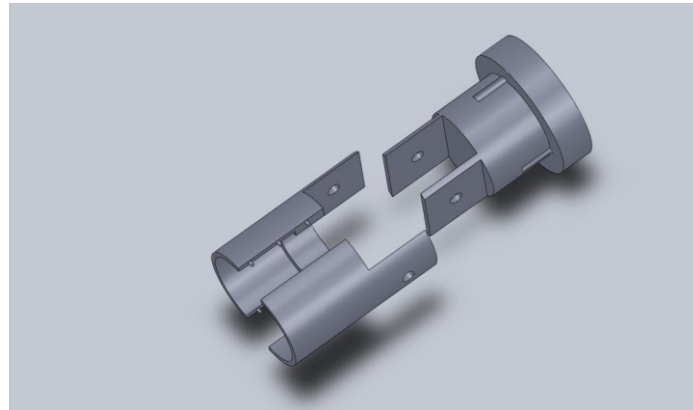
SolidWorks design of the connector between the tactile probe head and the robot arm.
